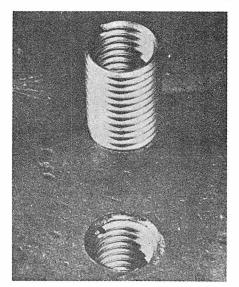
A thread insert and a completed repair are shown above. Special tools are provided in thread repair kit for installation of thread insert.
